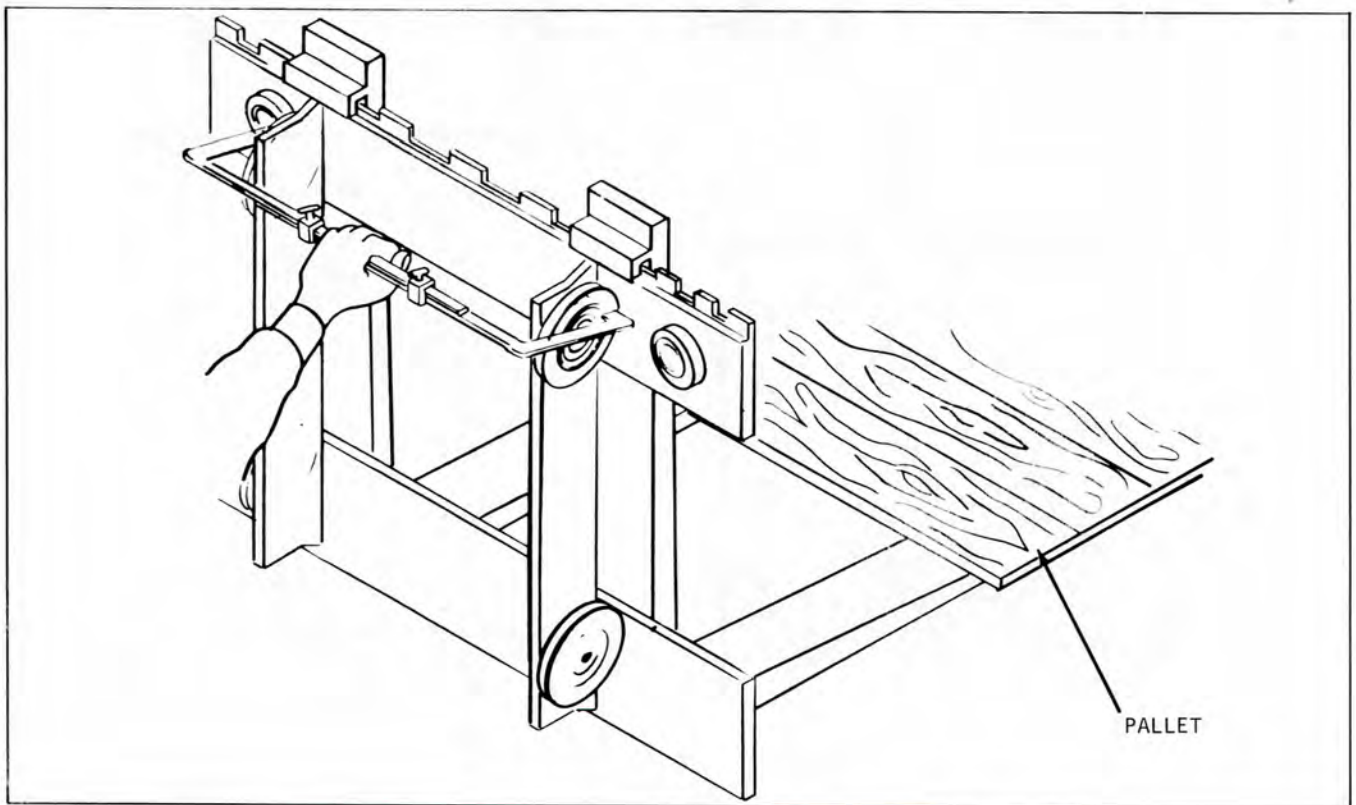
Spanning Upper Rollers (Four Roller Carriage)
